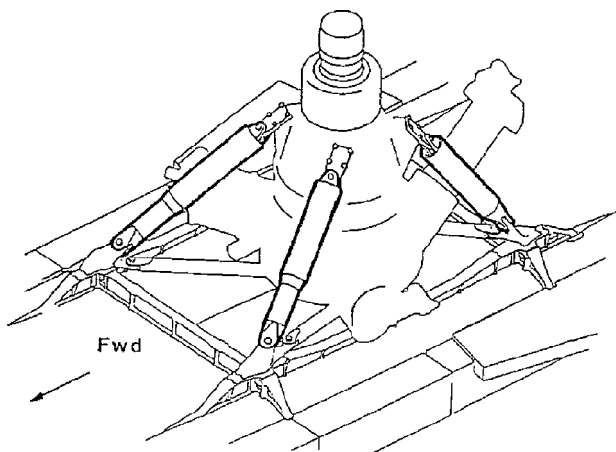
Helicopter main rotor gearbox installation, showing the location of the support struts.
